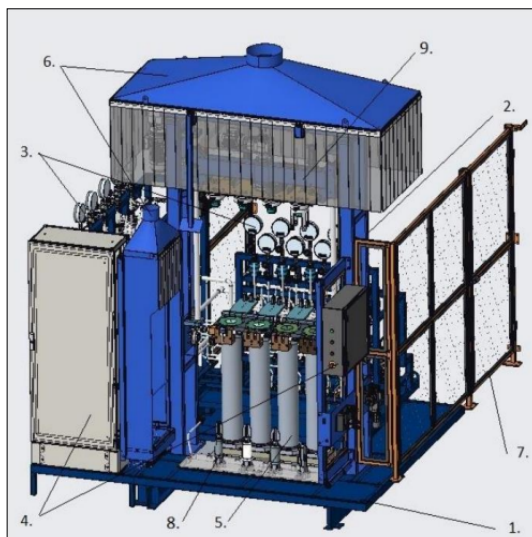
Structure of the Vulcanizing Press 1. Base frame 2. Machine frame 3. Technological stands (2 pcs) 4. Electric cabinet 5. Vulcanising chambers (4 pcs) 6. Exhaust hoods (2 pcs) 7. Safety fence 8. Cooling units (4 pcs) 9. Traveling beam
